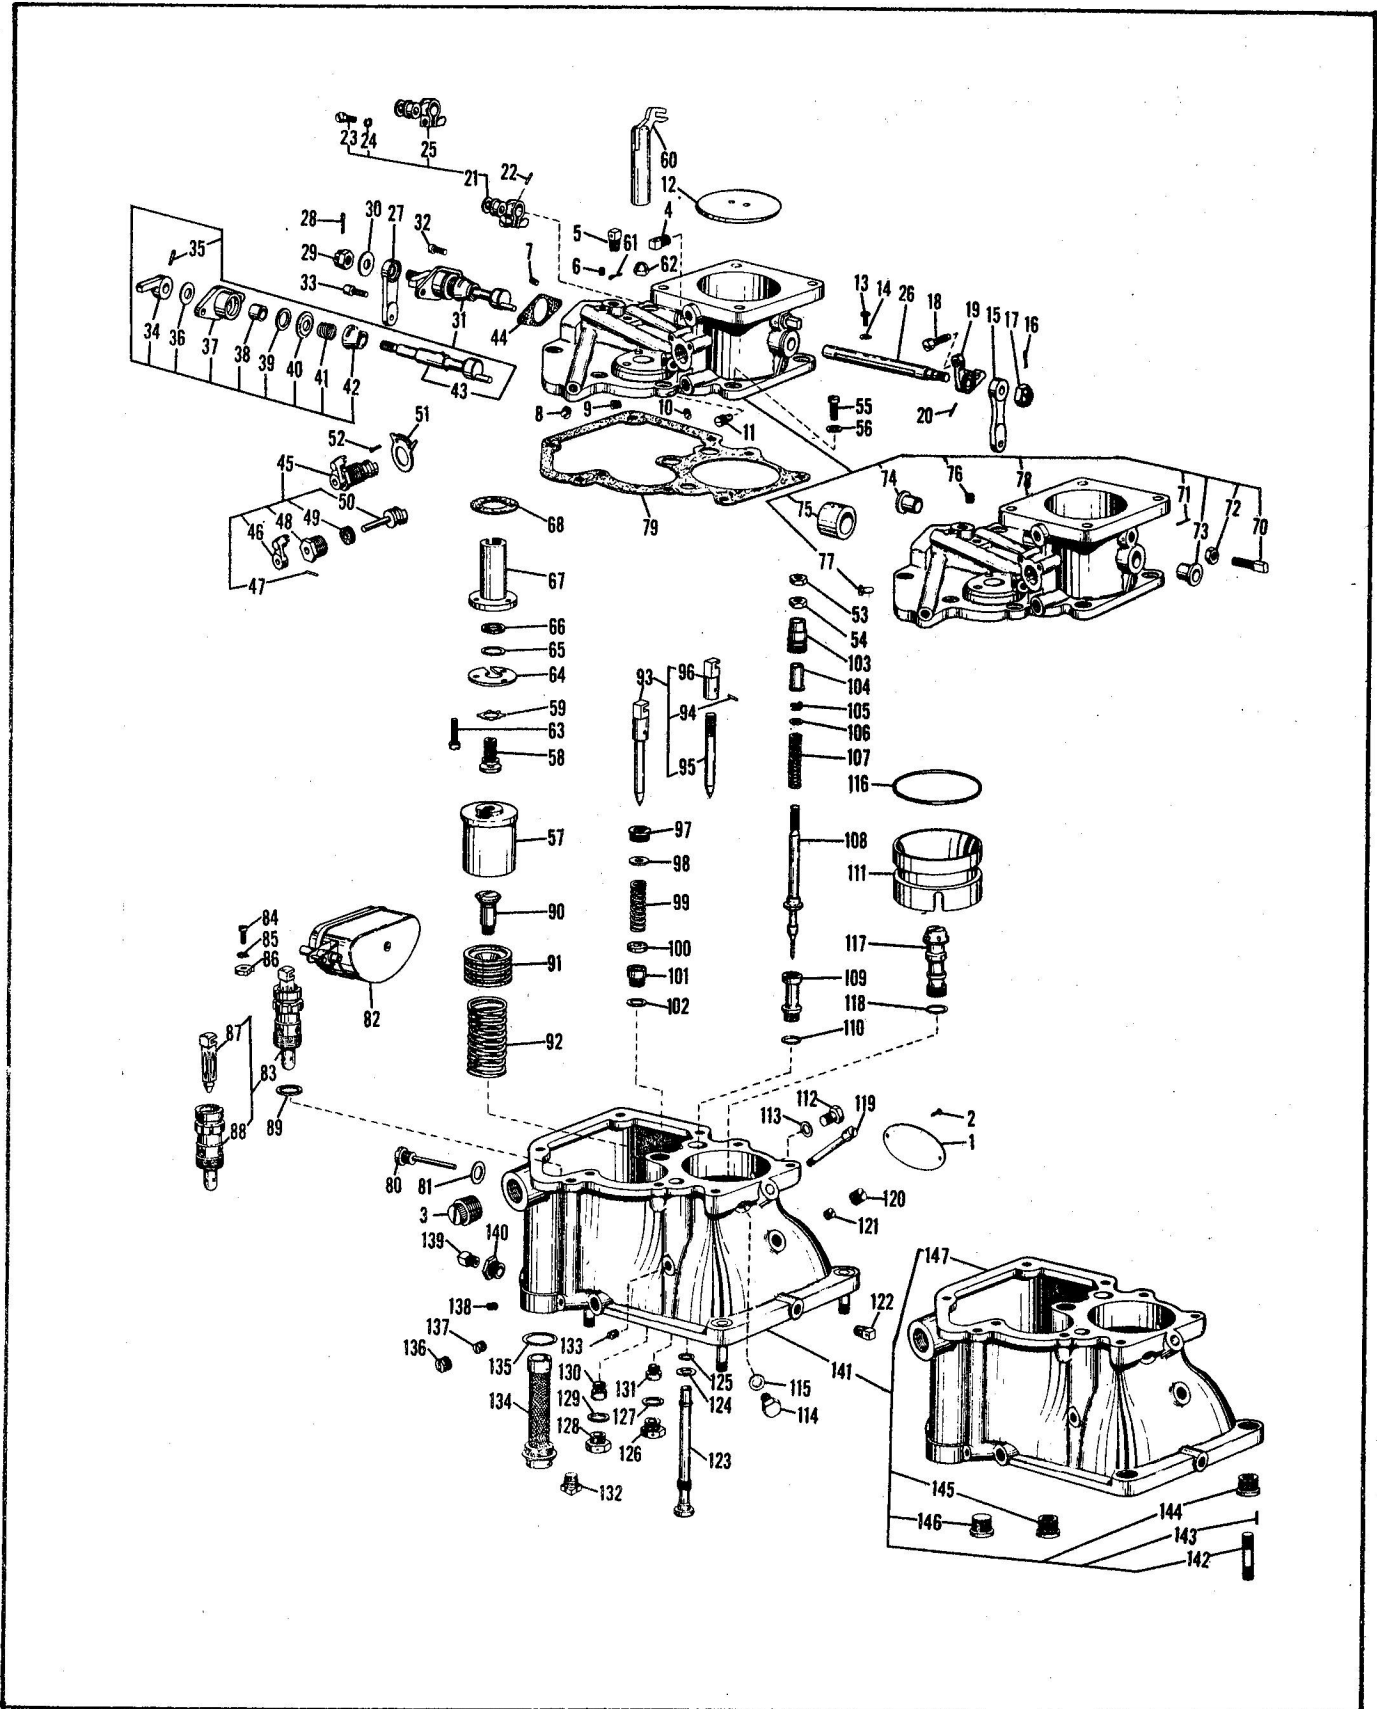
NAR9B Carburettor Assembly - Exploded View
